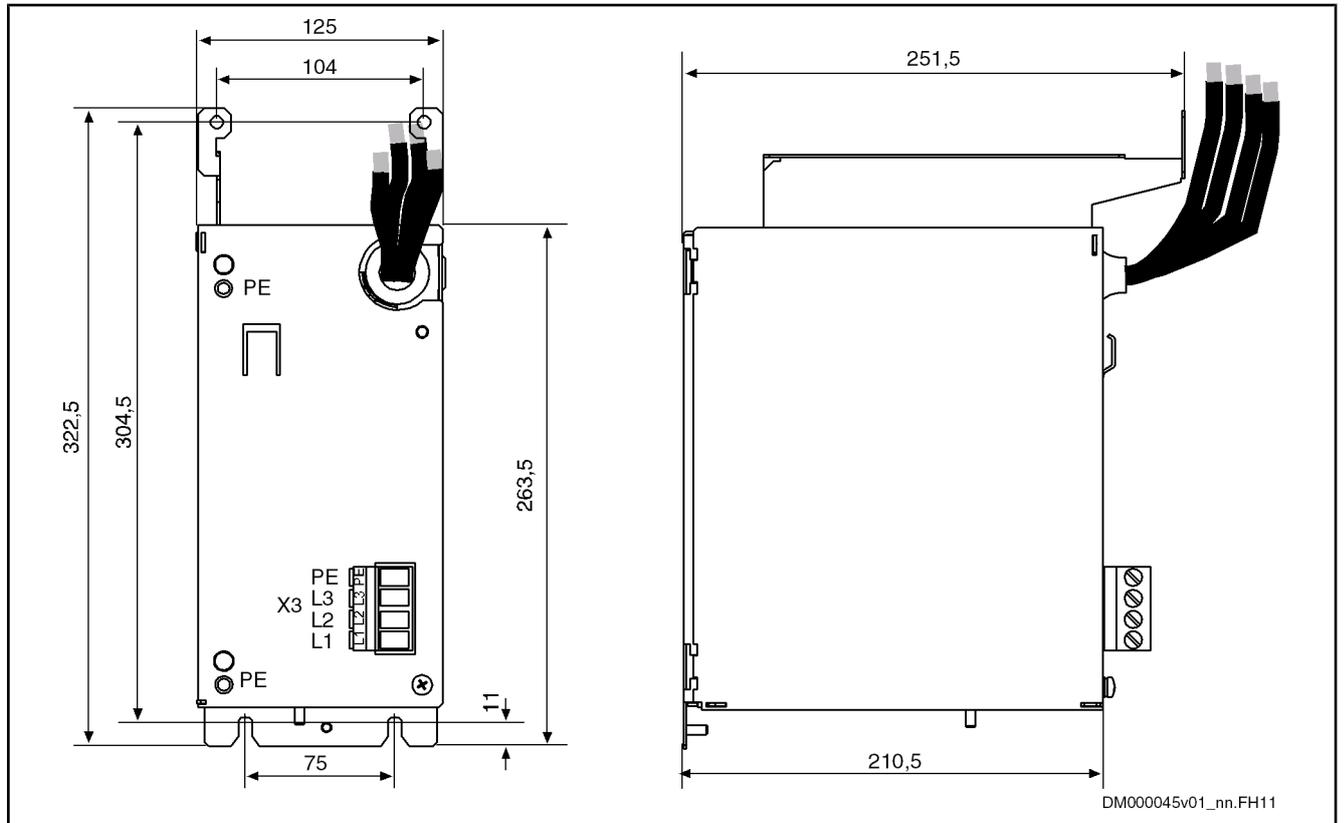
Dimensions mains filter HNK01.1A-A075-E0050
